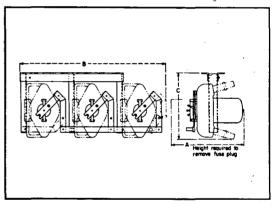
Short way mounted rack for assembly for sealed oil cutouts
